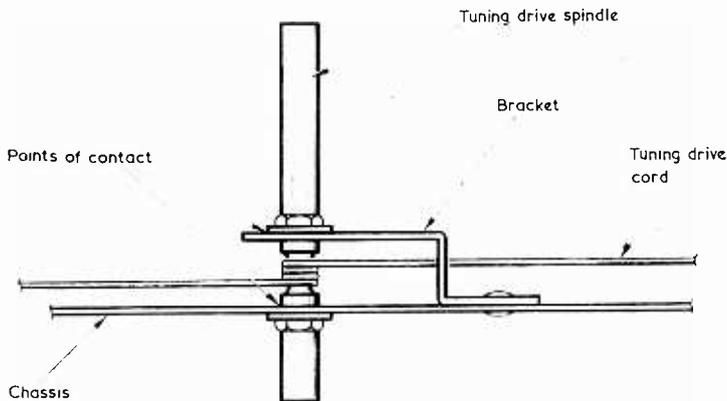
In this typical tuning drive spindle mounting, the spindle simply revolves in holes in a mild steel chassis and support bracket. In consequence, the electrical contact between the spindle and the chassis, as the former is rotated, is of an intermittent character
